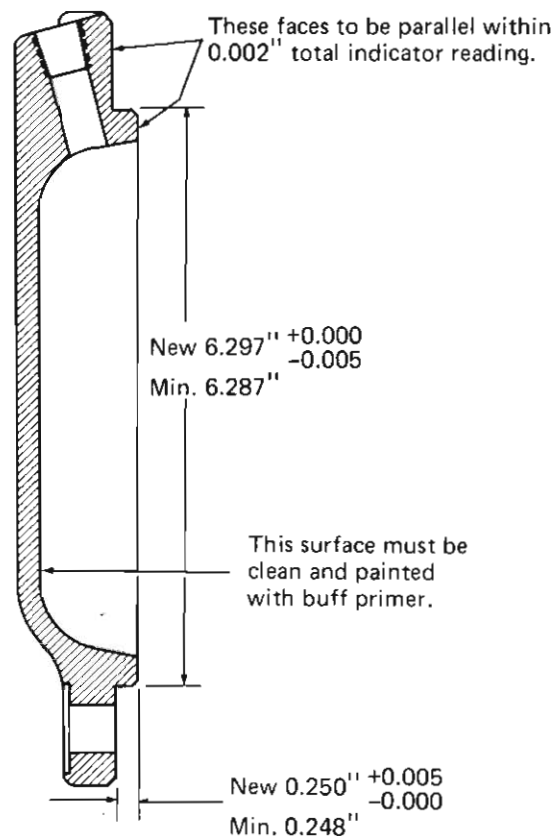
Model D29, D31, And D36 Commutator End Bearing Housing
